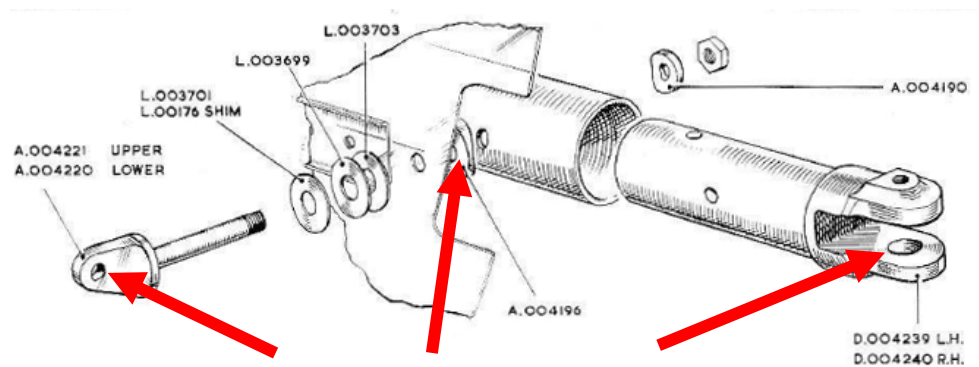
Three fracture critical traceable locations on the engine (left) and wing (right) attachment fitting
